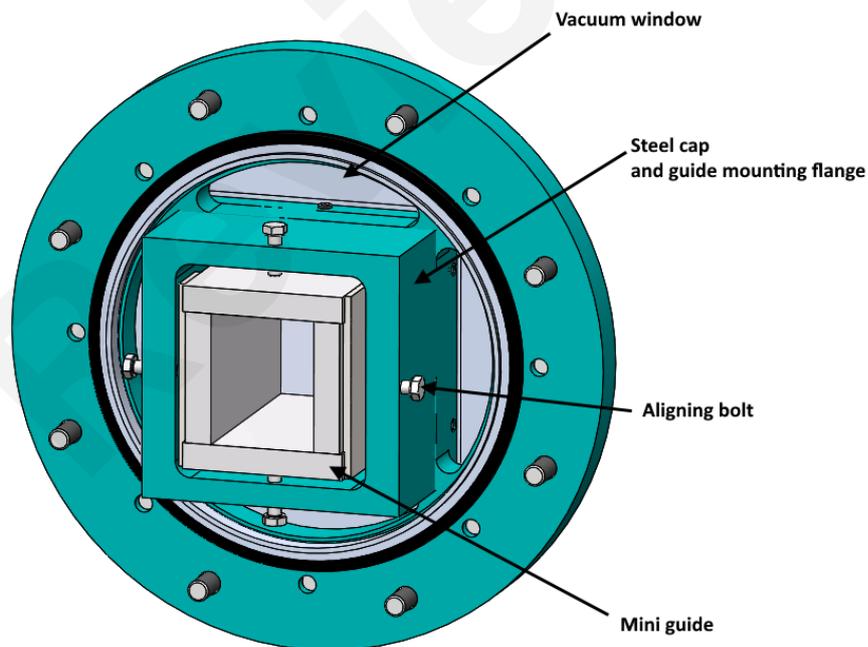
Design of the guide mounting flange on the SL2 assembly.
